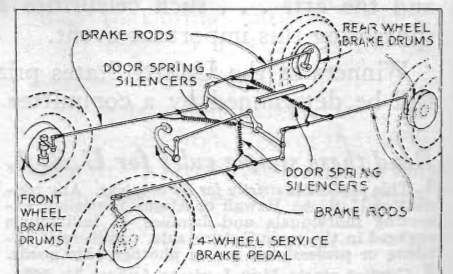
Old screen door springs can be adjusted to your car to stop brake rattling.
